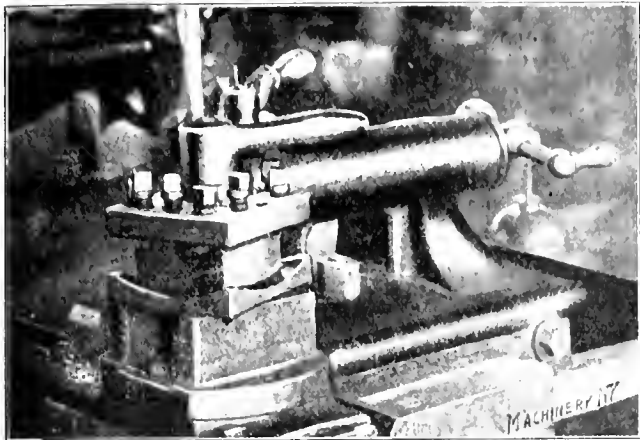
Lathe Turret Tool-post for Holding Four Tools
